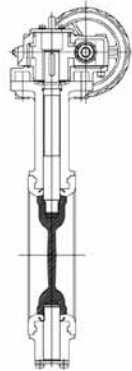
Wafer type (valve inserted between flanges and tightened with bolts and nuts)³
